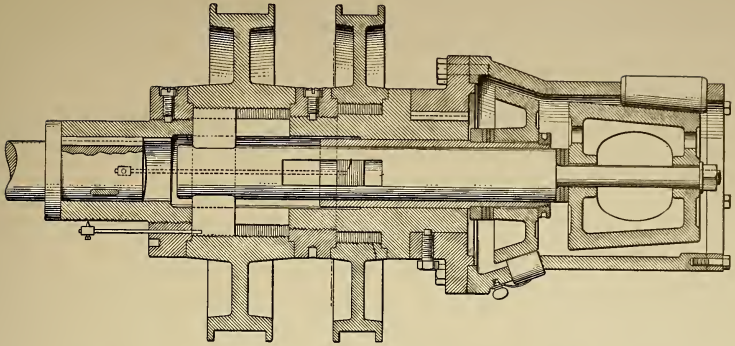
SECTIONAL VIEW OF 20-INCH TOOL FOR EXPANDING AND FLARING, SHOWING INDEPENDENT FEED FOR EXPANDING AND FLARING MANDRELS
